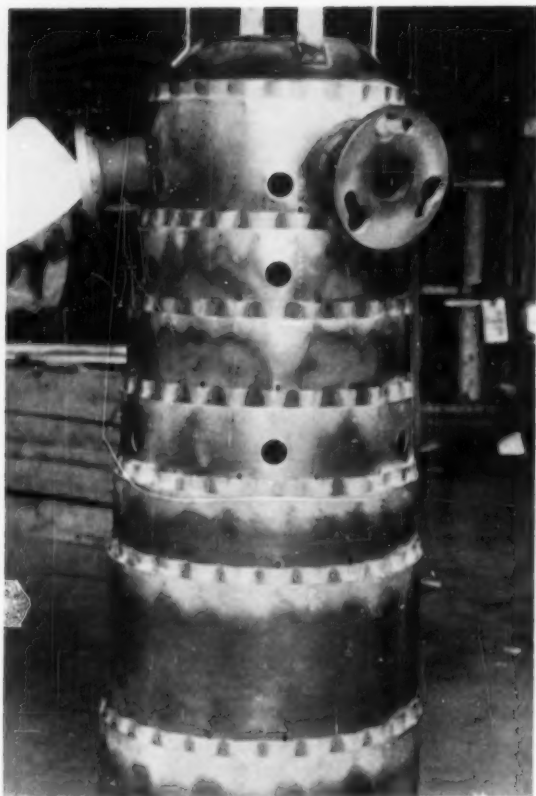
Combustor basket. Note small drill holes at each step to increase secondary air for improved combustion
